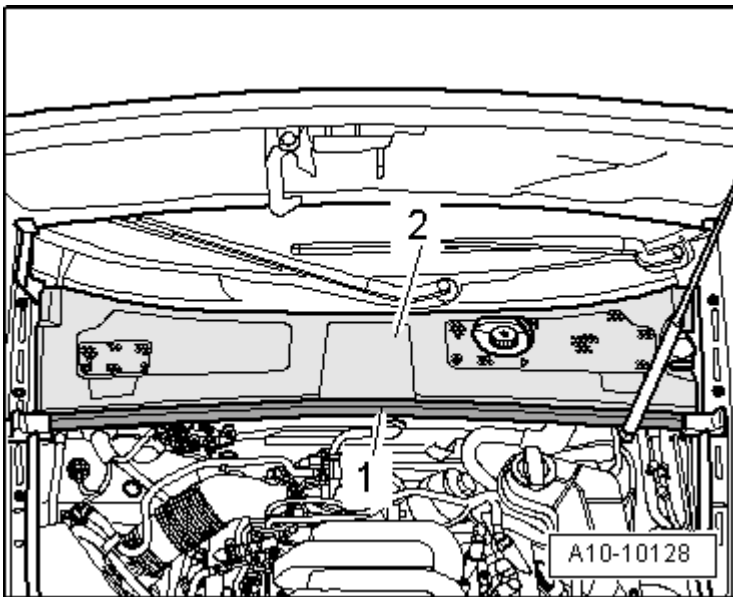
Removing Rubber Seal For Plenum Chamber Cover & Plenum Chamber Cover
